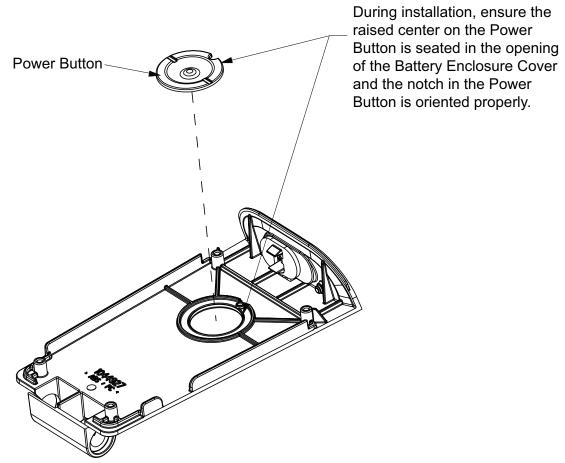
FIGURE E: POWER BUTTON REMOVAL/INSTALLATION (ENTIRE CLAMSHEELL ASSEMBLY NOT SHOWN)
